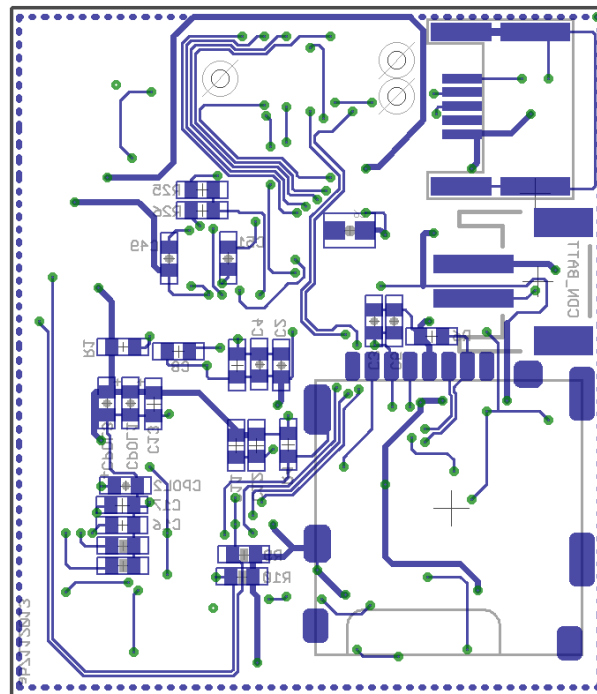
BTE\_MICRO\_V2.7 Main PCB bottom copper
